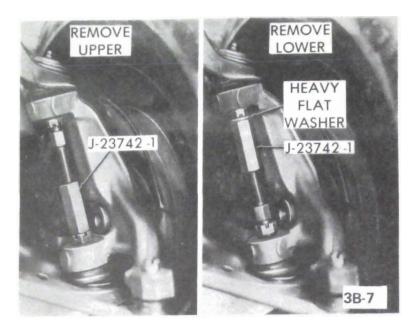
B-7 Separating Steering Knuckle from Ball Joints
